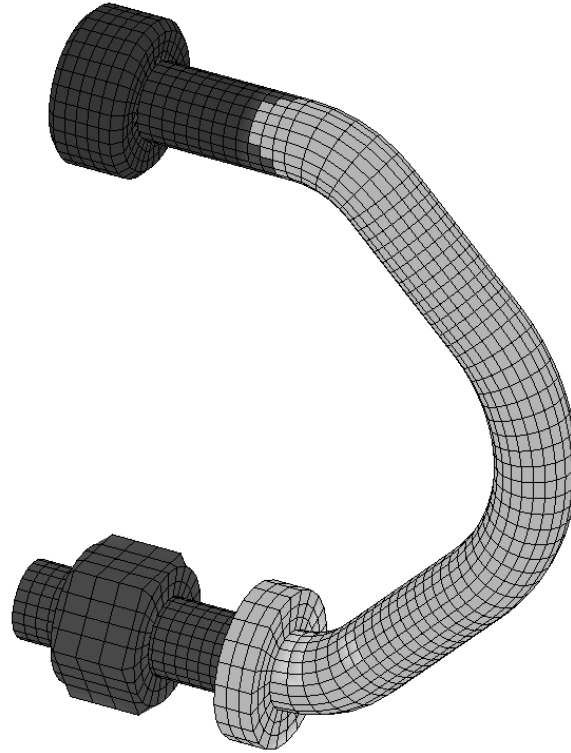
Keyway Bolt with Null Shell Wrap Masked to Expose Button Head
